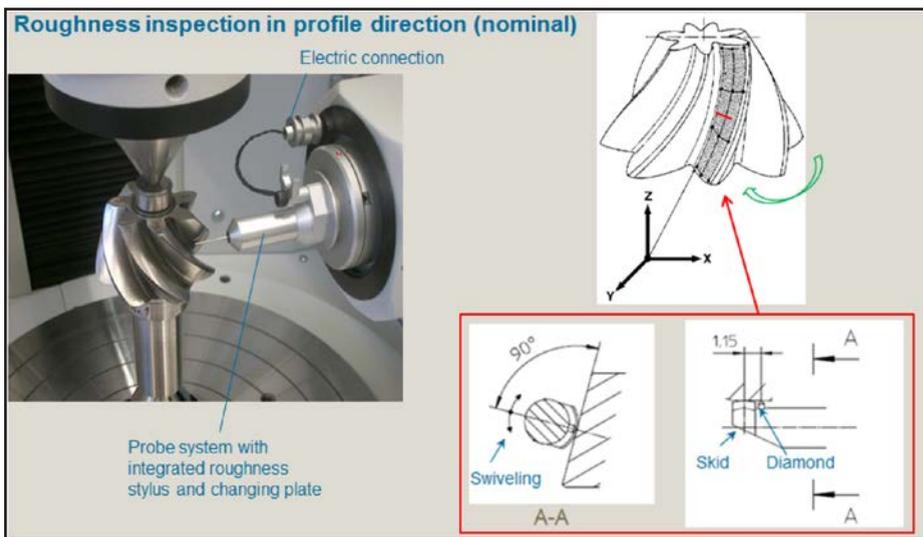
Roughness testing device (bevel gear) on gear measuring centers.
